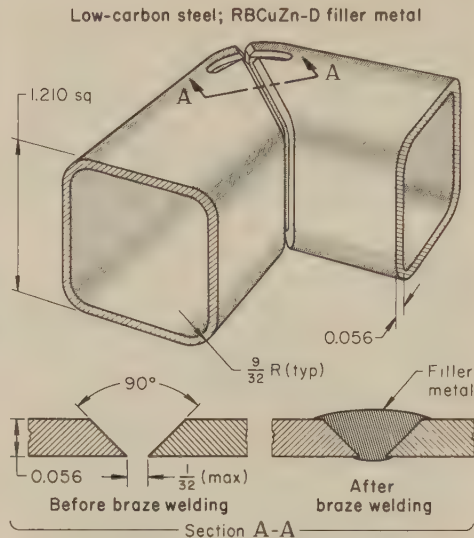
Mitered corner joint in a tubular part used in manufacturing metal furniture. Poor appearance of plated joint was eliminated by a change in filler metal used in braze welding. (Example 524)
